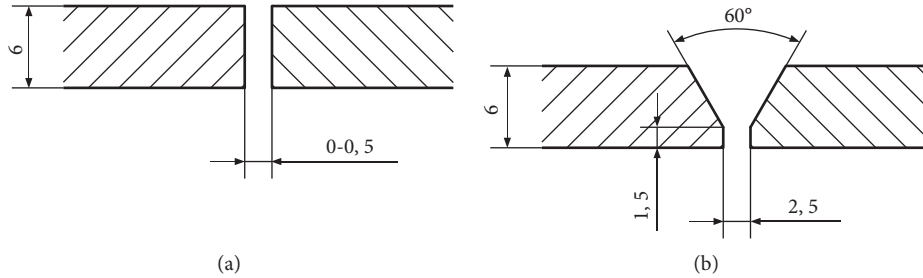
Geometry of welded elements prior to the implementation of joints: I-shaped (a) and V-joints (b).
